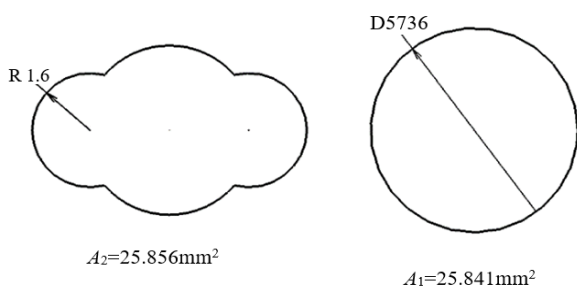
A view of simple cylindrical and Earring shaped hole film cooling hole geometry
